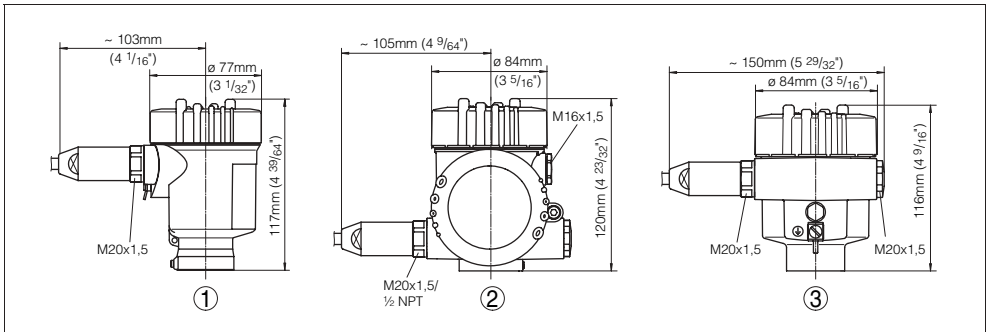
Housing versions in protection IP 66/IP 68, 1 bar (with integrated indicating and adjustment module the housing is 9 mm/0.4 in higher)
